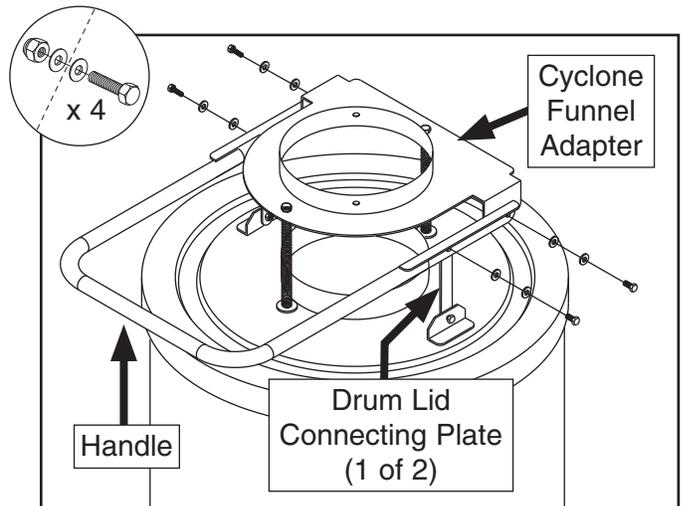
Attaching collection lid handle to connecting plate and adapter.
